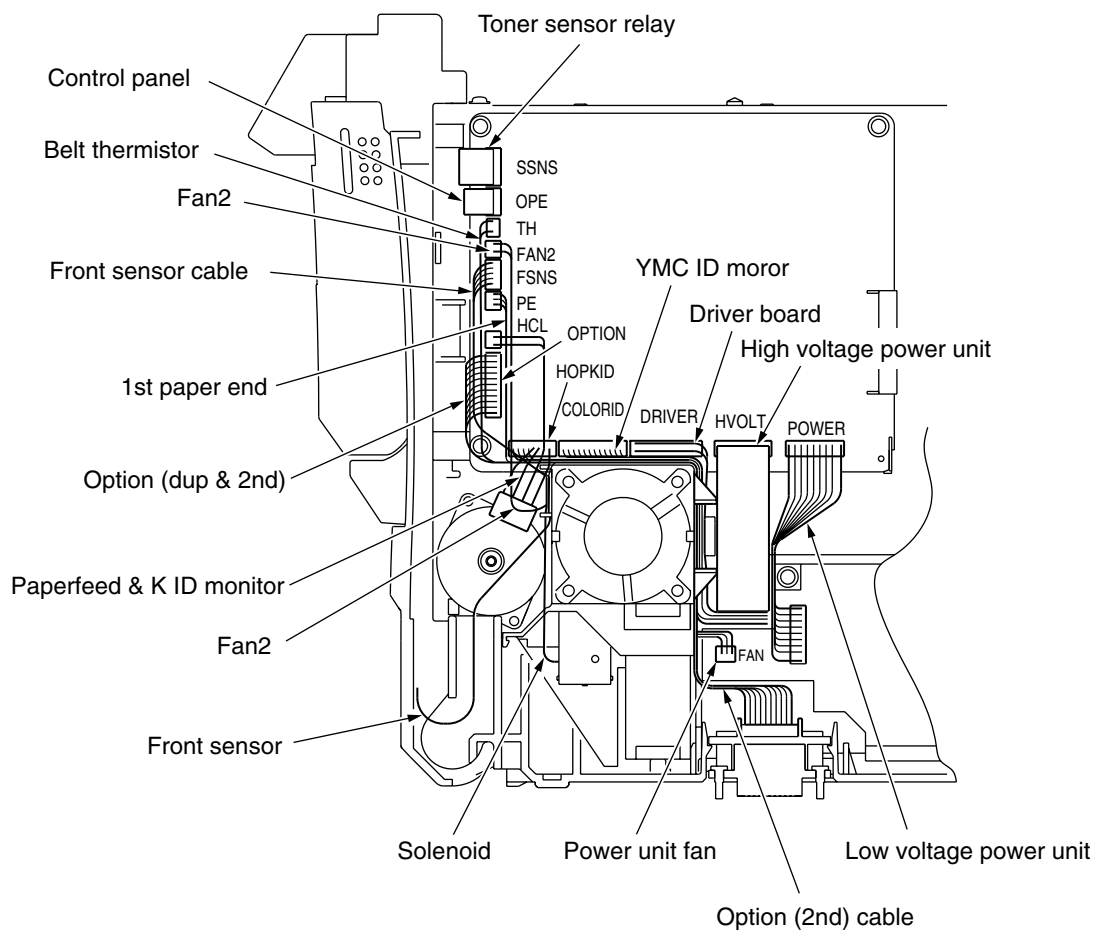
Print Engine Controller Board Cable Route
